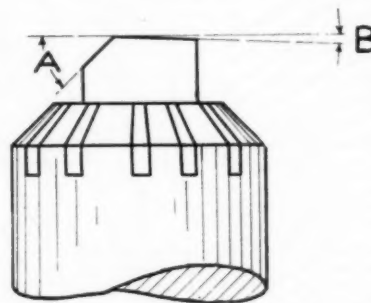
STANDARD FORM OF DIAMOND TOOL FOR TURNING AND BORING
